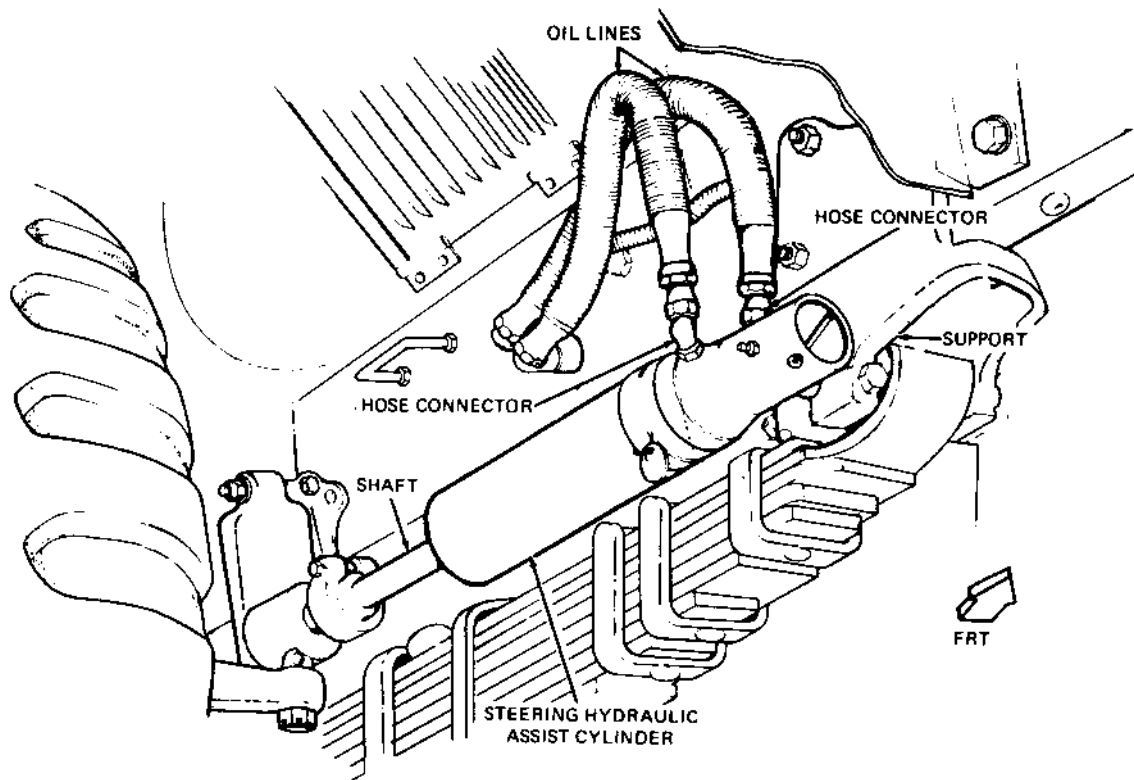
Steering gear hydraulic oil pressure and return hoses.
